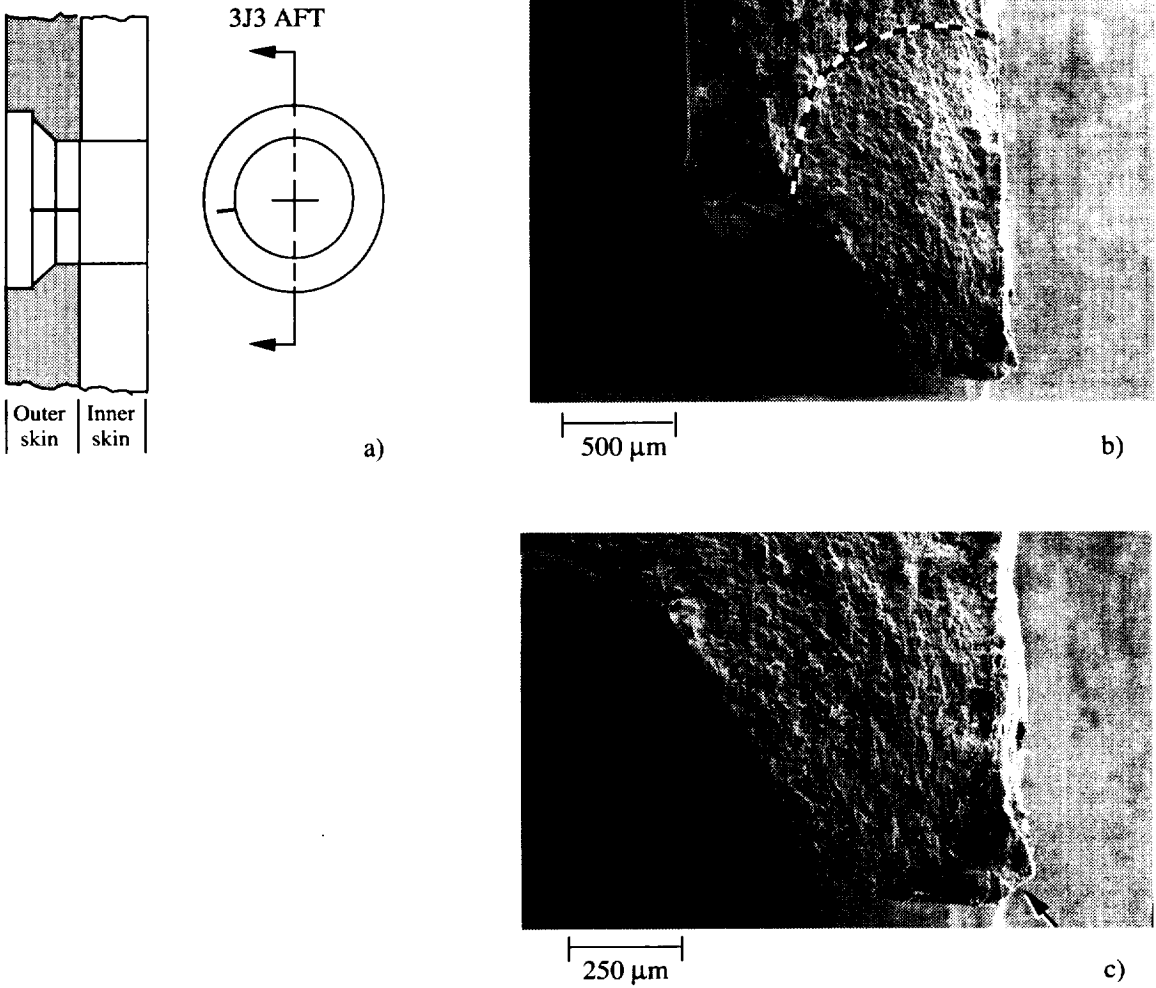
a) The schematic shows the rivet hole 3J3 configuration and the location of the outer skin fatigue crack oriented in the aft direction below the 9 o'clock position. b) The SEM micrograph shows the fatigue crack located at the rivet hole. The dashed line marks the fatigue crack front. c) The SEM micrograph shows the fatigue crack fracture surface at the rivet hole shank region. The arrow marks the likely region of crack initiation at the inboard corner of the rivet hole.
